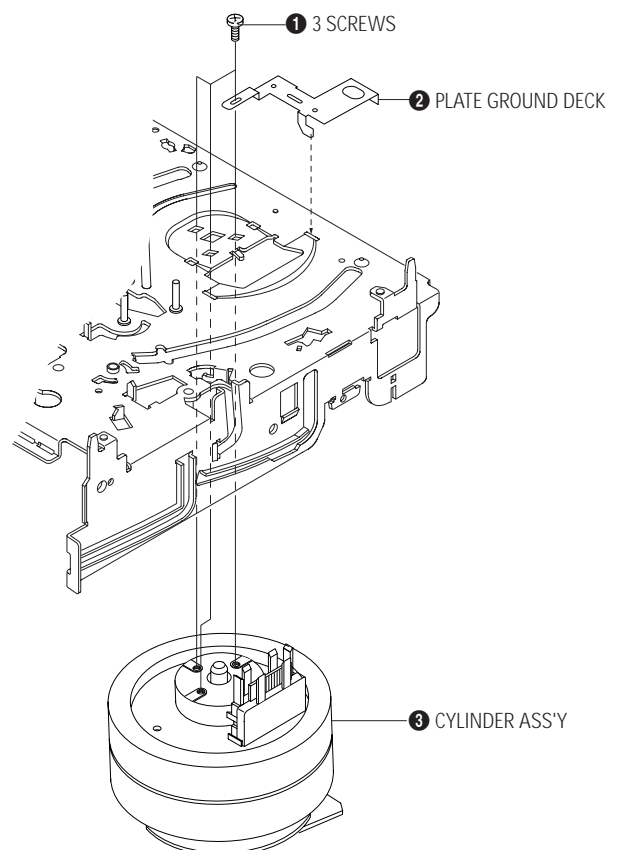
Plate Ground Deck, Cylinder Ass'y Removal
